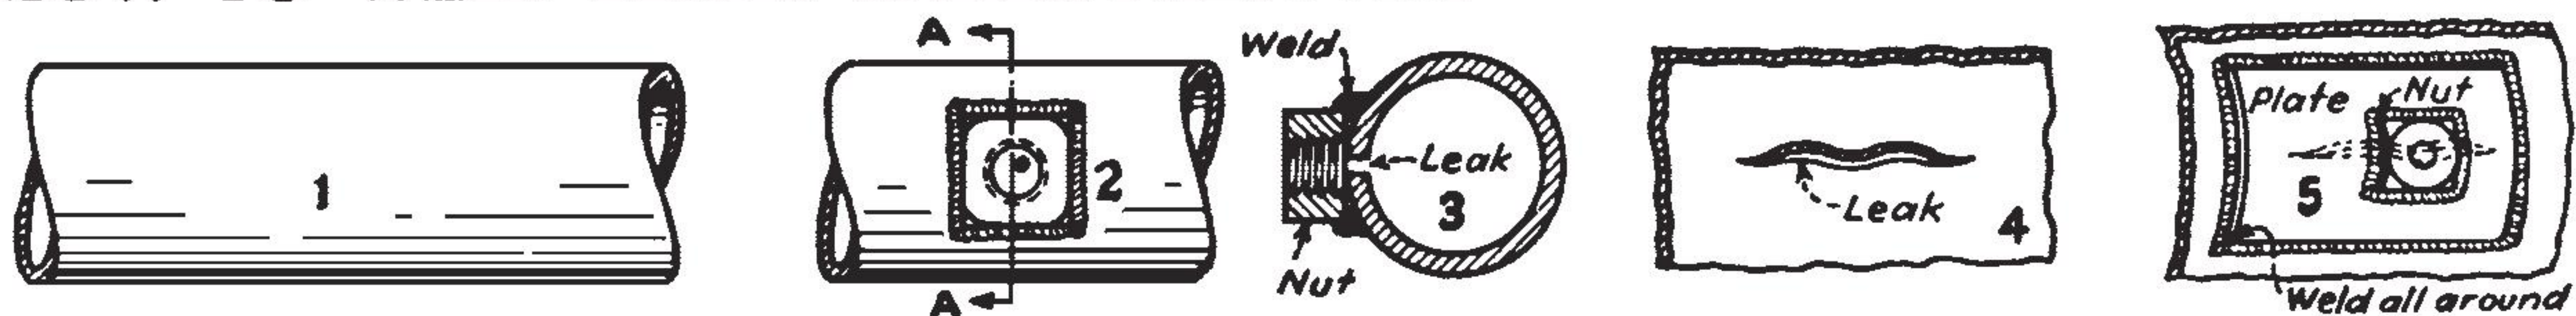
Use of welding in piping maintenance. Electric-arc welding is a quick way to stop leaks in pipe under pressure. To close pinhole leak (1), weld an ordinary square-head machine nut around leak (2, 3). This permits water, etc., to escape through the hole in the nut during welding, making it possible to complete the weld. To stop the leak, screw a bolt into the nut with sealing compound. A cracked or split pipe (4) can be closed in the same way. This kind of leak usually is too large to be covered by a nut; so a piece of plate stock is applied as a patch. Drill a small hole in the plate and shape the plate to the pipe. Next, weld a nut over the hole and weld the plate to the pipe (5). Then screw in a bolt or plug, using sealing compound.
